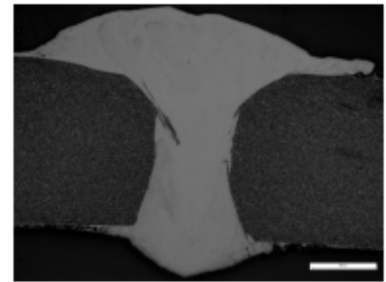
Cross section images from welds made in AlSi coated boron steel using optimized laser-hybrid welding
